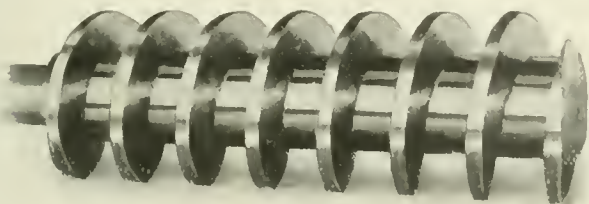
Worm Machined in One Cut in an Automatic Thread Milling Machine—Diameter 5 inches
